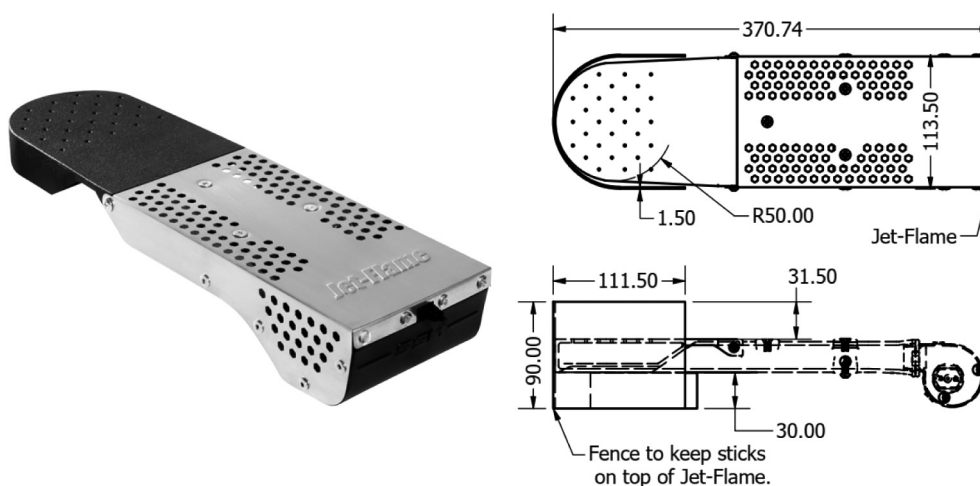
Jet-Flame A) product and B) CAD drawings.
